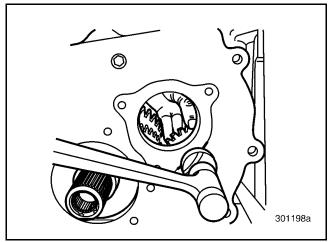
Installing No. 2 Reverse Idler Shaft and Gear
